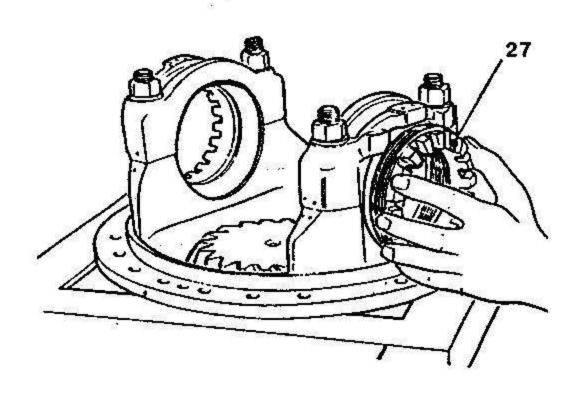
CHECKING THE ADJUSTING NUTS FIT
